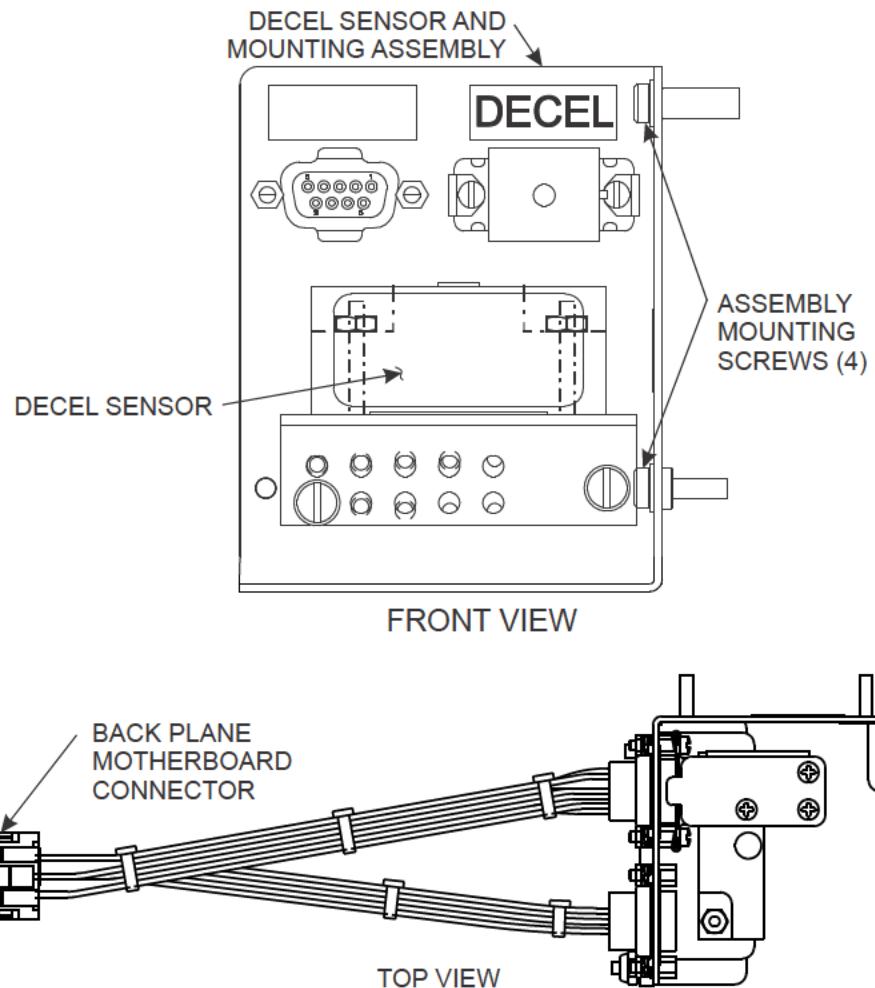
Decelerometer Sensor and Mounting Assembly Replacement Details
